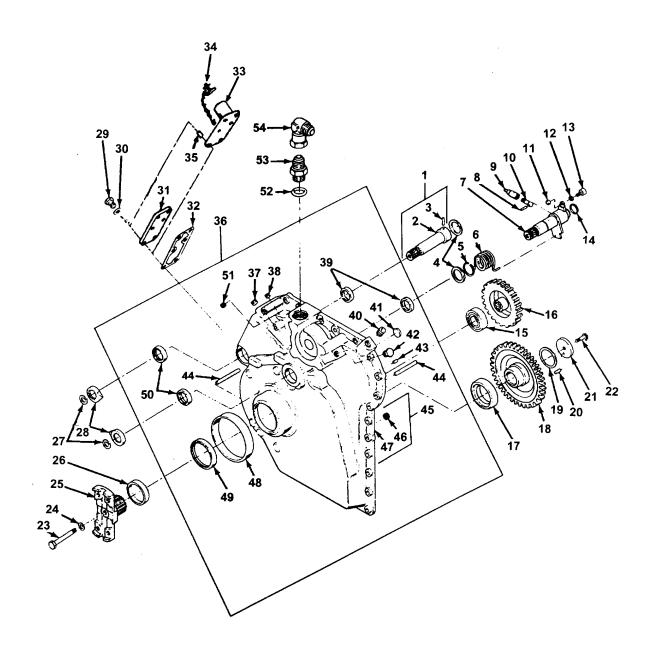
Right Hand End Cover and Brake Apply Cam Shaft.
